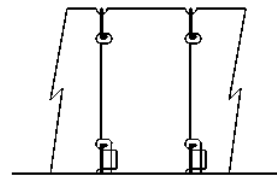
Block assembly methods 4-1c and 4-1d [2], [30]
